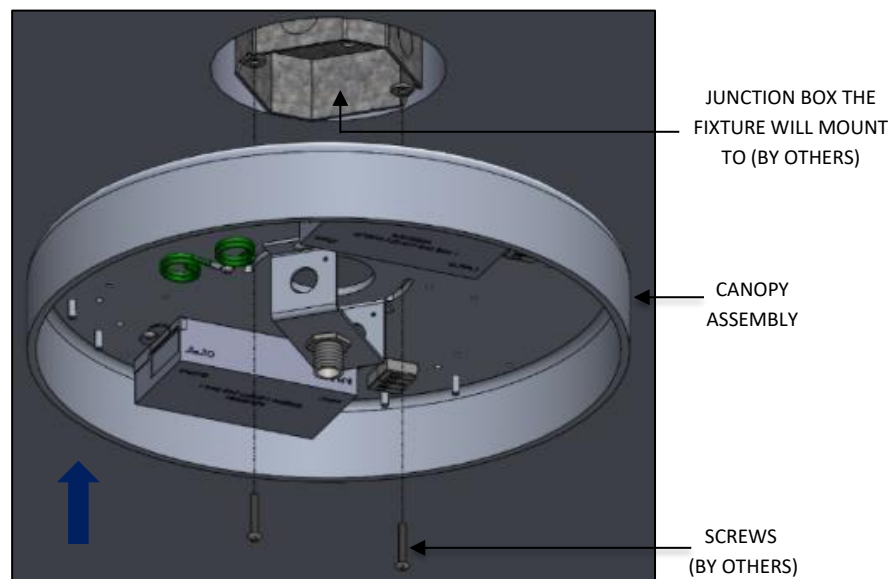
CANOPY ASSEMBLY INSTALLATION
